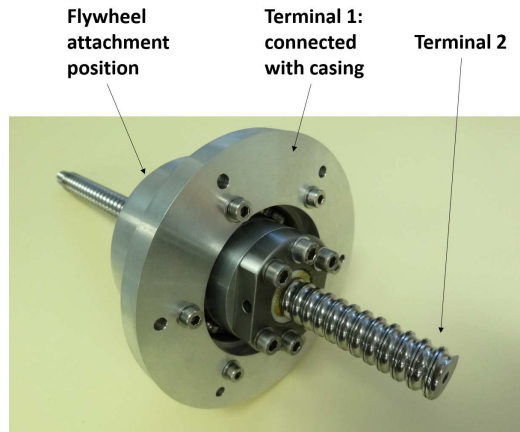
A ball-screw inerter, built at the University of Bristol, with its outer casing removed to enable adequate visibility of the threaded rod.
